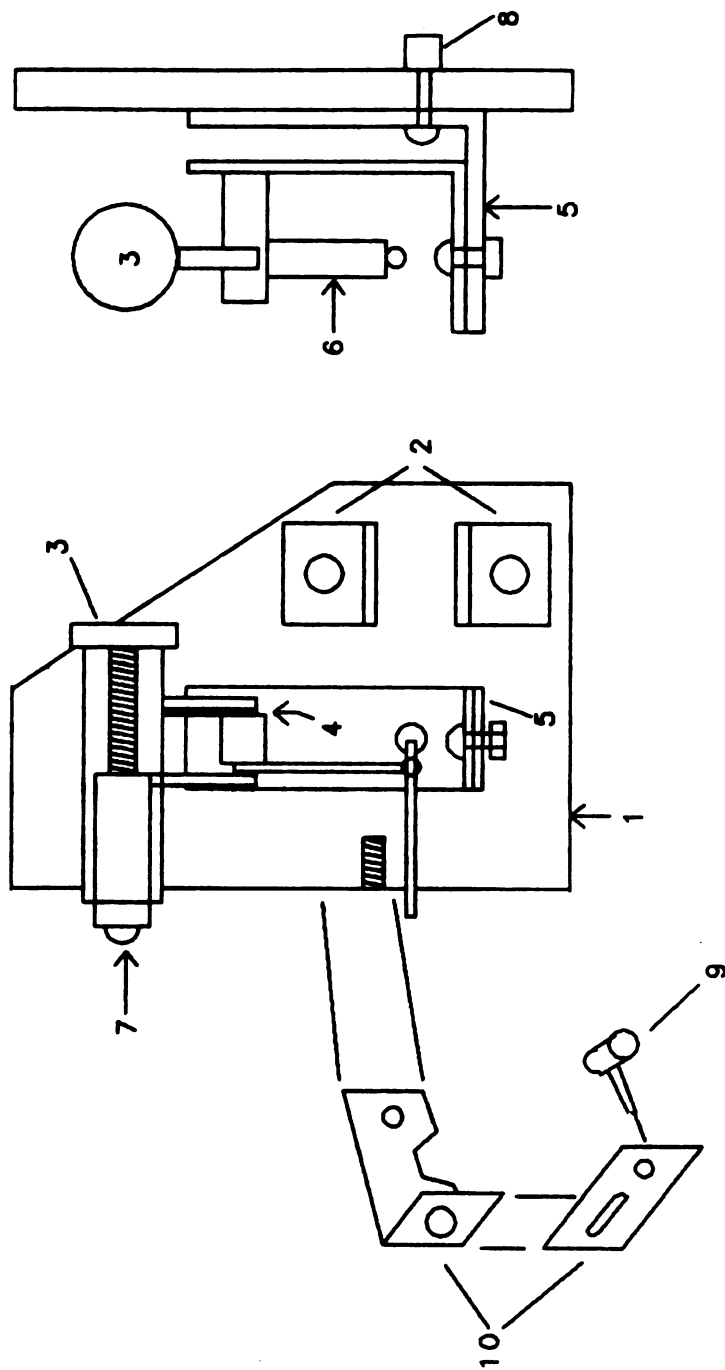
Bimorph and electrode mounting assembly (shown approximately 1.2 times enlarged). 1: 1/4" Plexiglas. 2: High voltage deflection plates. 3: Screw clamp. 4: Insulation. 5: Gimbal mount for positioning capillary. 6: Bimorph. 7: Electrical connection for bimorph. 8: Bimorph ground connection. 9: Cylindrical charging electrode 1/4" x 1/4" o.d. x 1/8" i.d. 10: Charging electrode positioning bracket.
